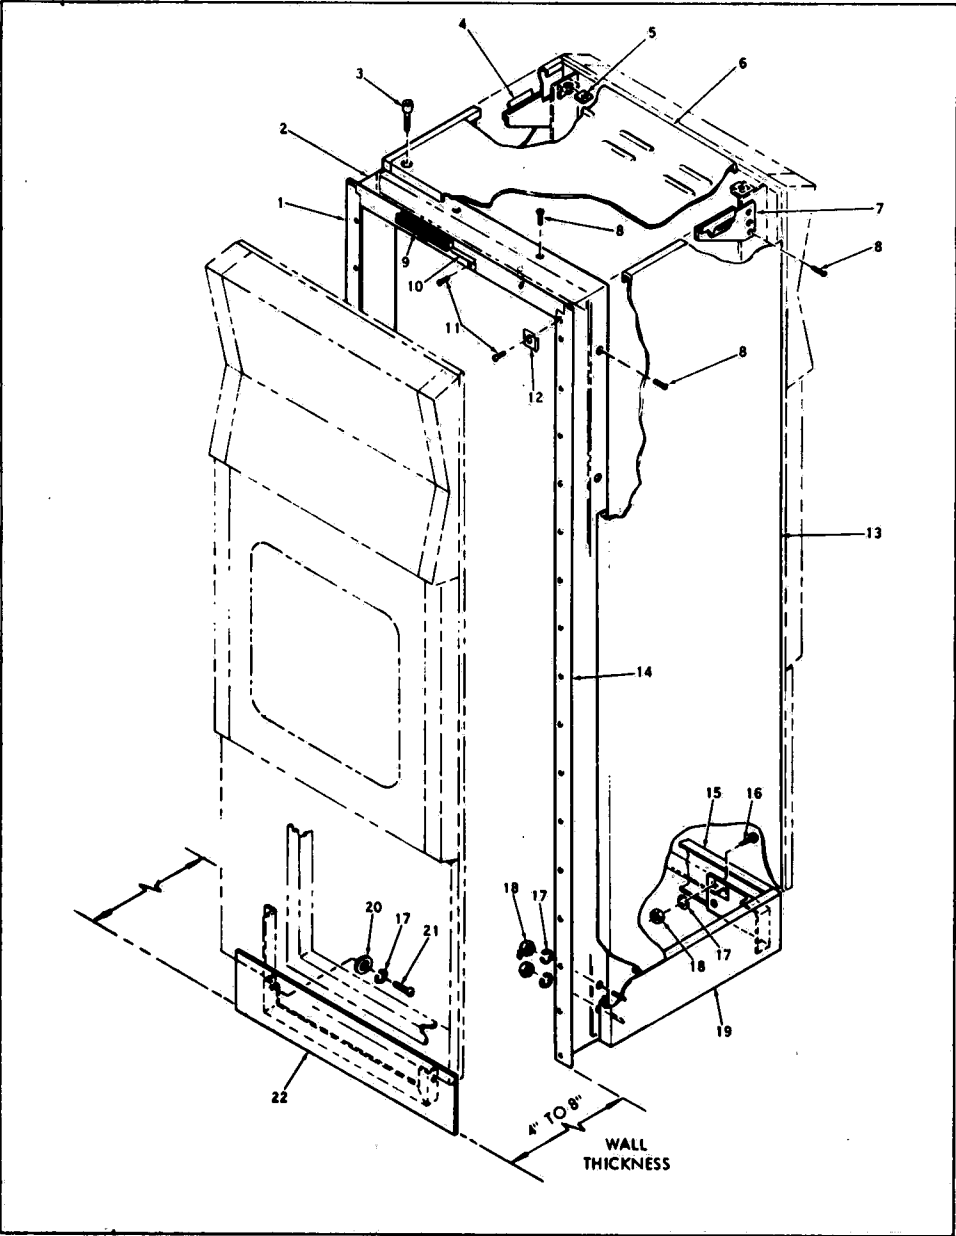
EXTERIOR HARDWARE: 30" Recessed, Double Door, One and Two Walls.
